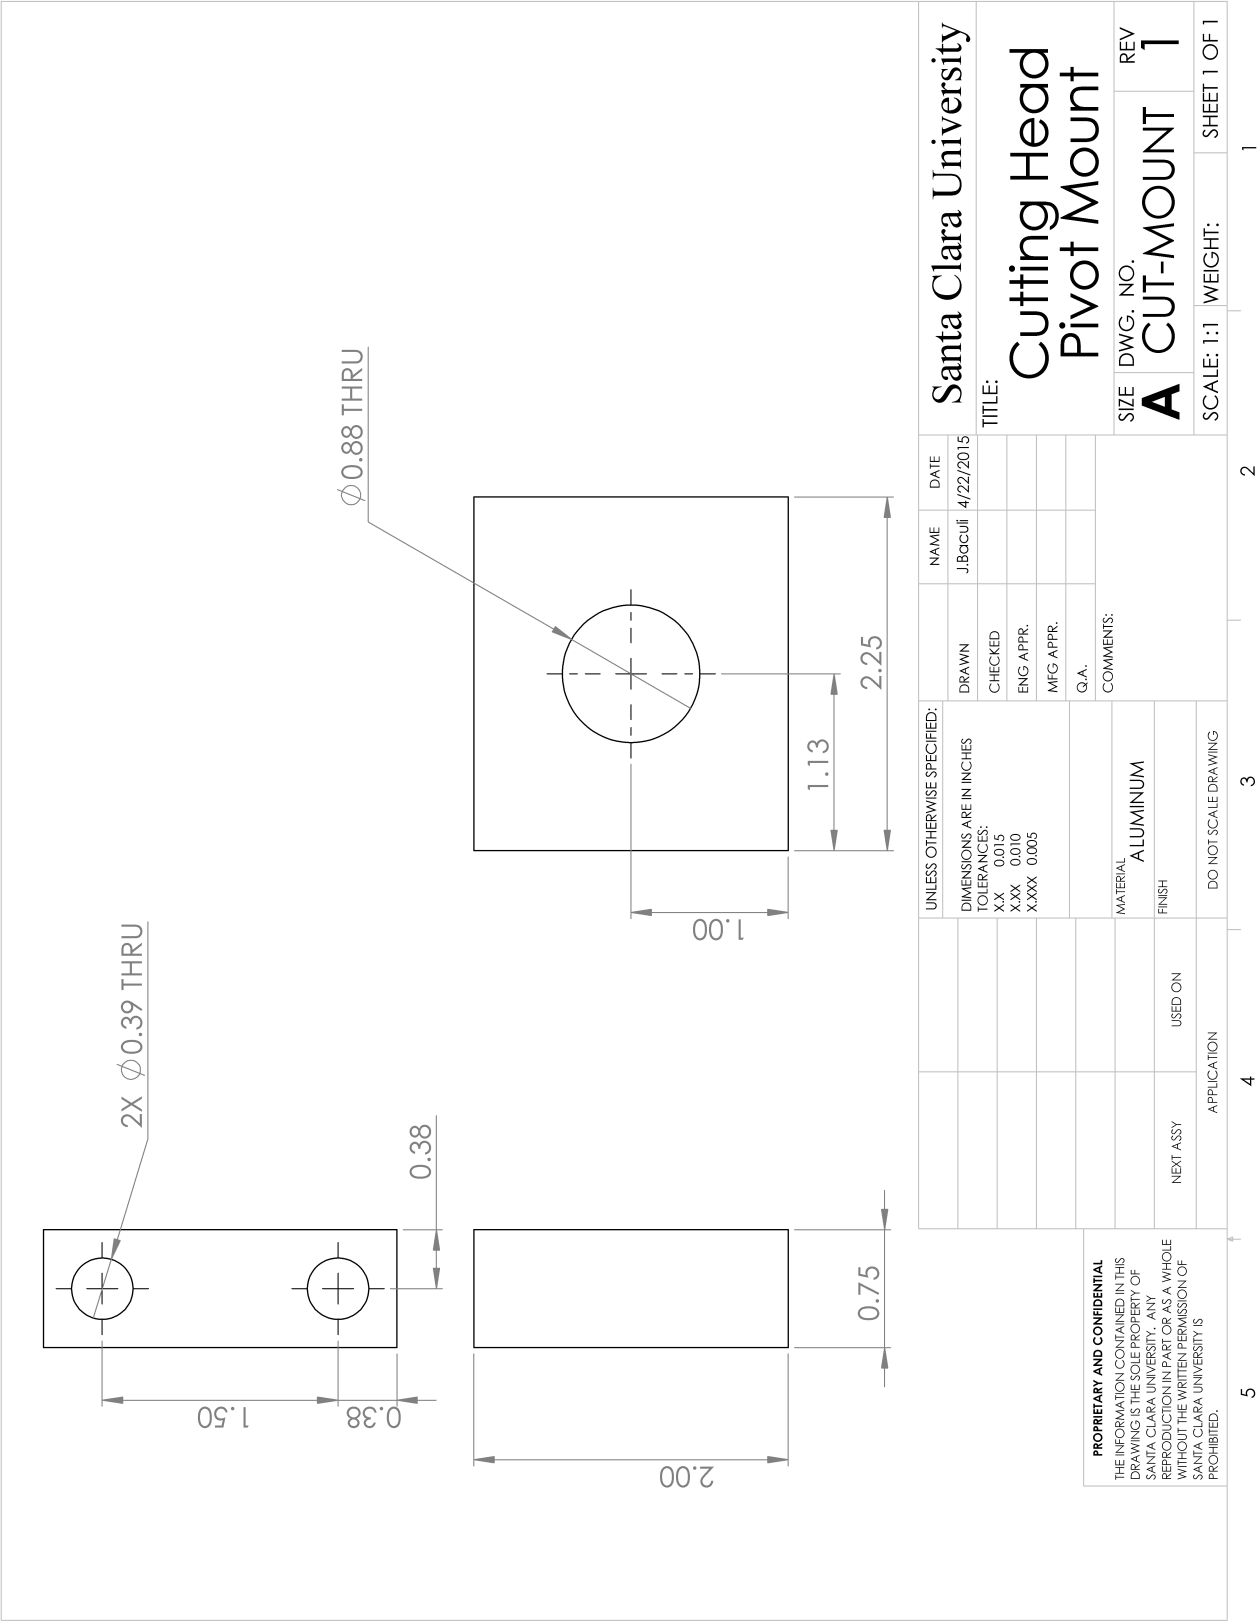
Pivot mount that goes into the disassembled cutting head to fix it in place.
